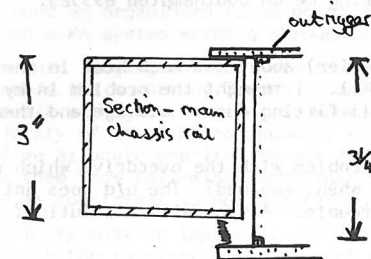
Attaching Mk11 outrigger to Mk1 main chassis rail.
